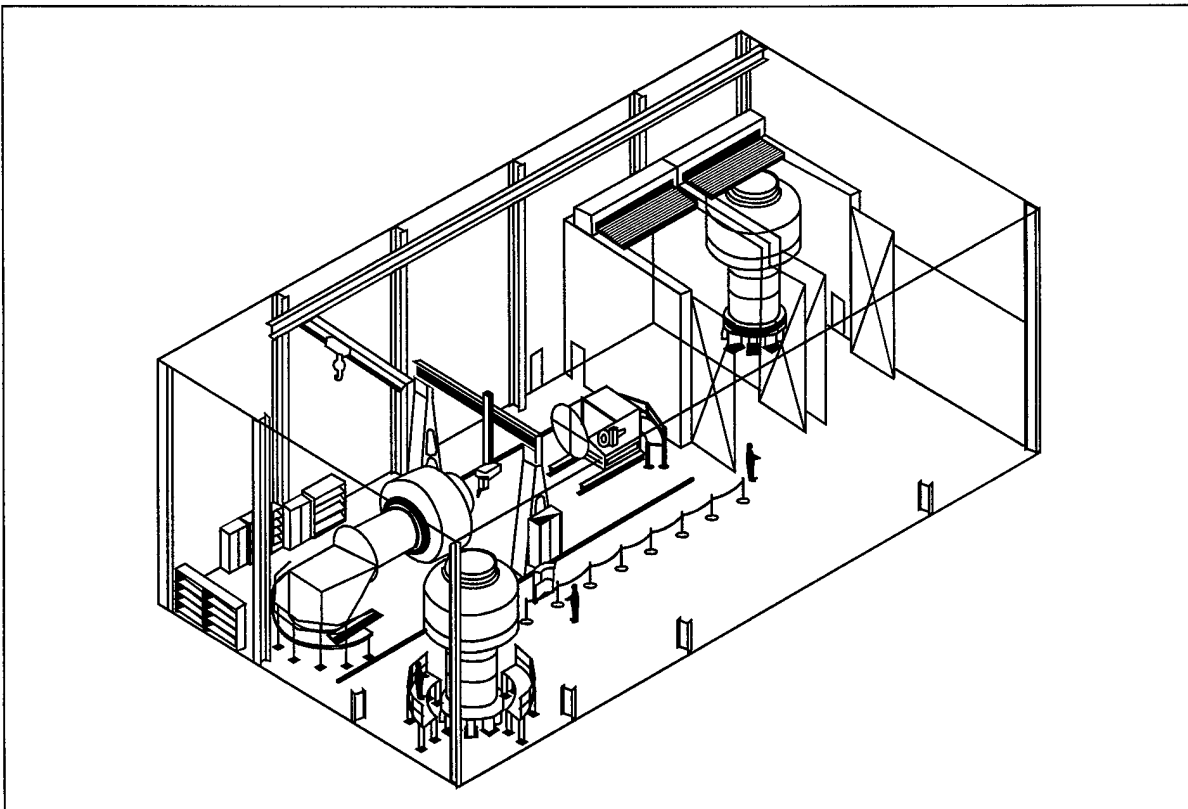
VPPA WELDING AND INSPECTION
